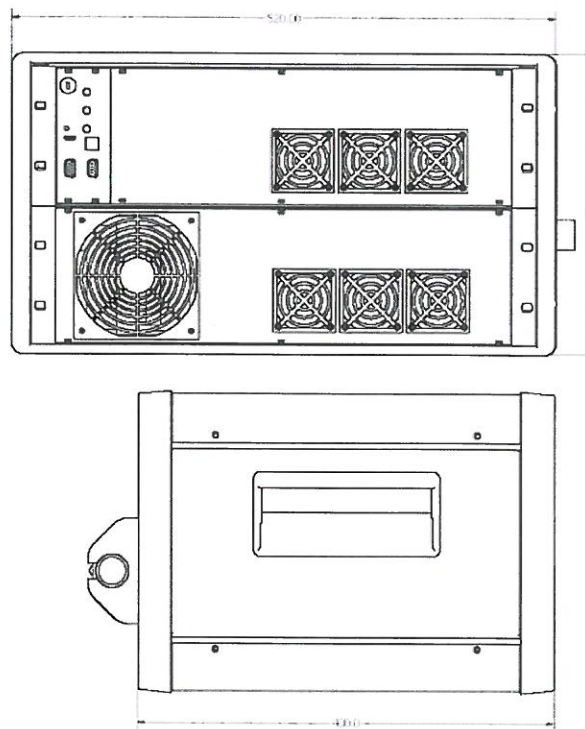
Dimensions of NT242 laser power supply/cooling rack. Desktop case.
